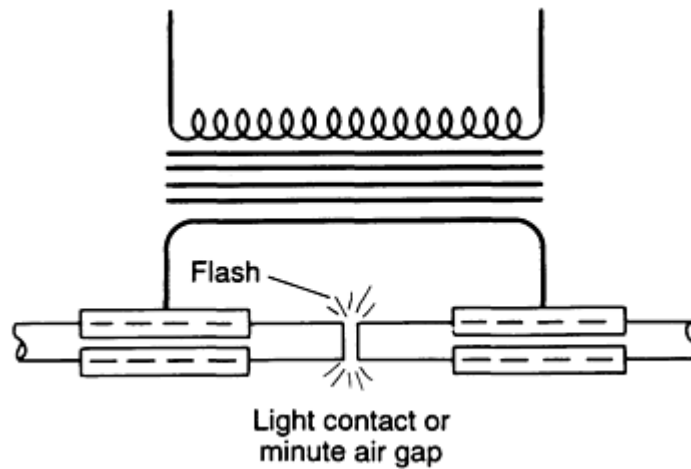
TYPICAL FLASH-WELDING SETUP SHOWING AIR GAP PRESENT BETWEEN ENDS OF TWO BARS
